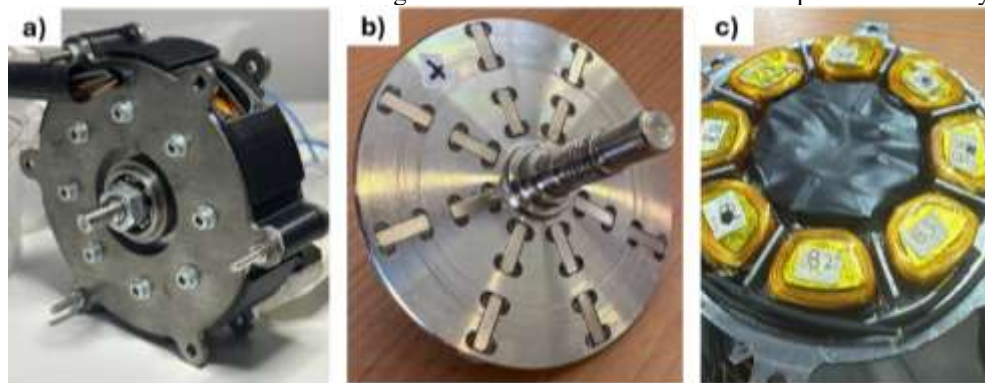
Pictures of the assembled actuator (a), rotor (b), and one of the yokes that form the stator (c)
